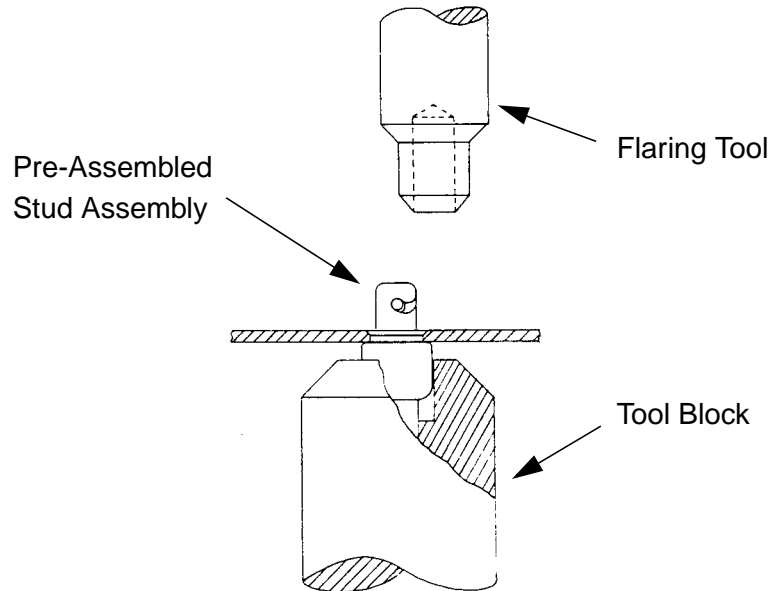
Installation of Pre-Assembled Stud Assemblies using a Power Driven Installation Tool
